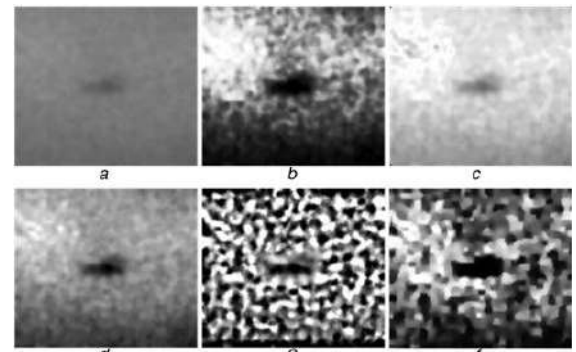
RT (Radiographic Testing) images with weld defect [14].
